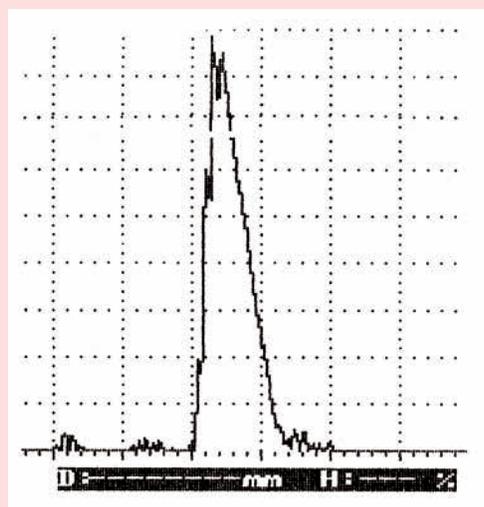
Weld step signal from a sound end cap weld
